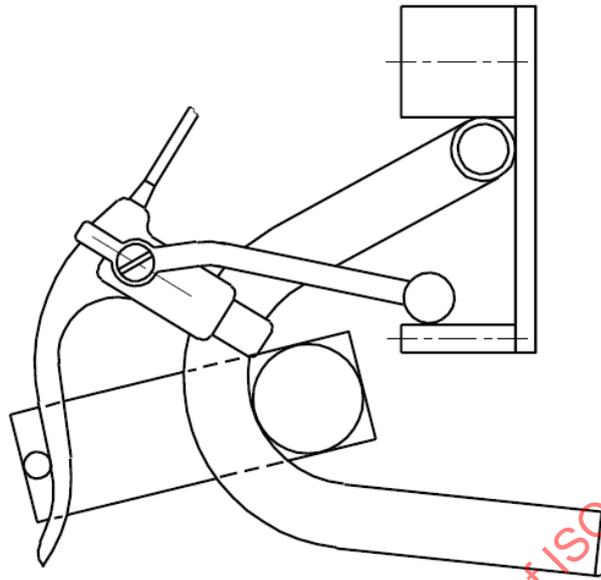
Method of fitting the gauge to the brake lever and handlebar for type C
